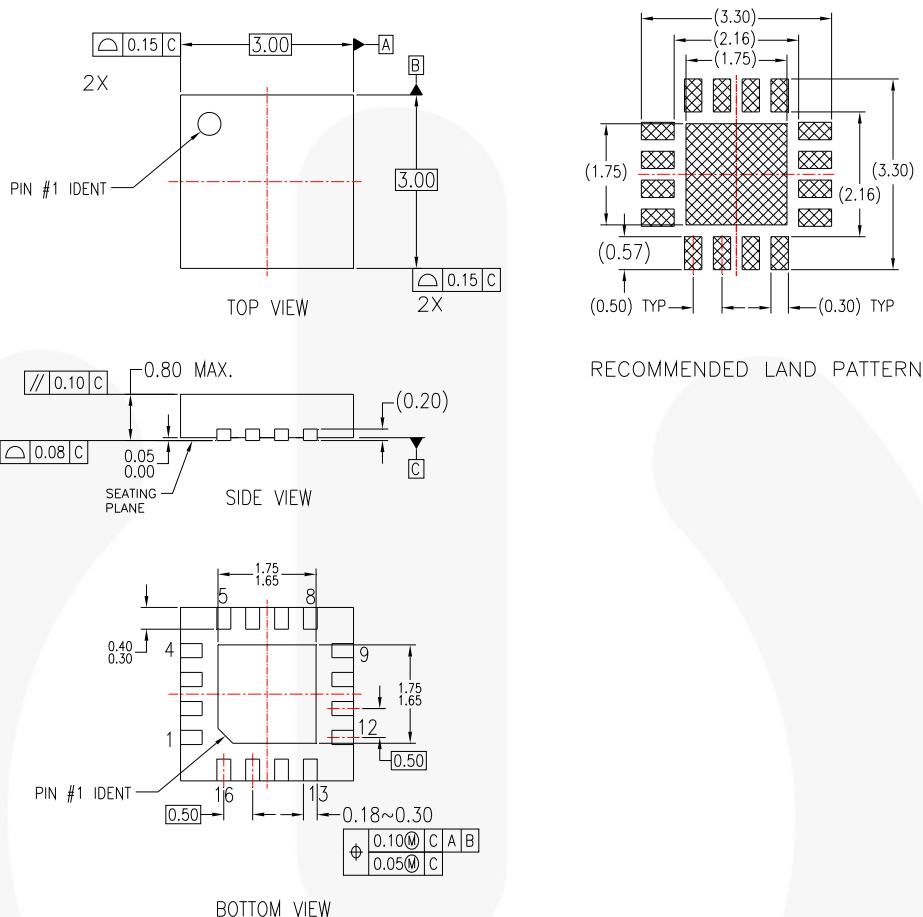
16-Pin, Ultrathin Molded Leadless Package (UMLP)
